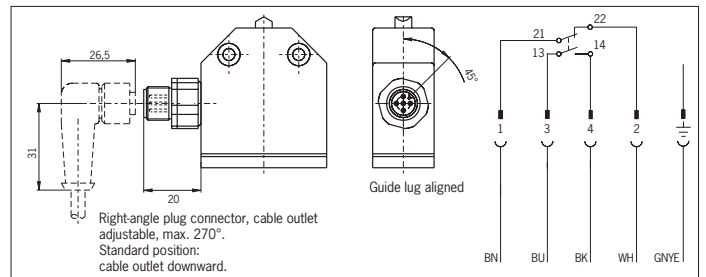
Dimension drawing/connection diagram SN01.558SVM5 with plug connector M12 (SVM5, 5-pin)
